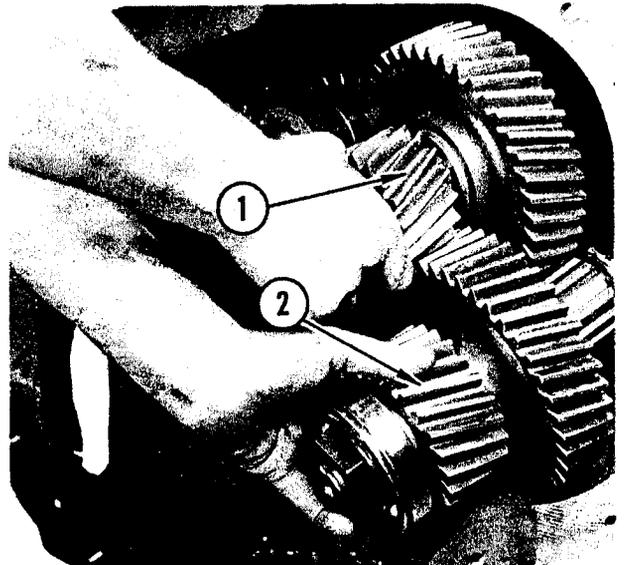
REMOVE CREEPER GEAR ASSEMBLY
